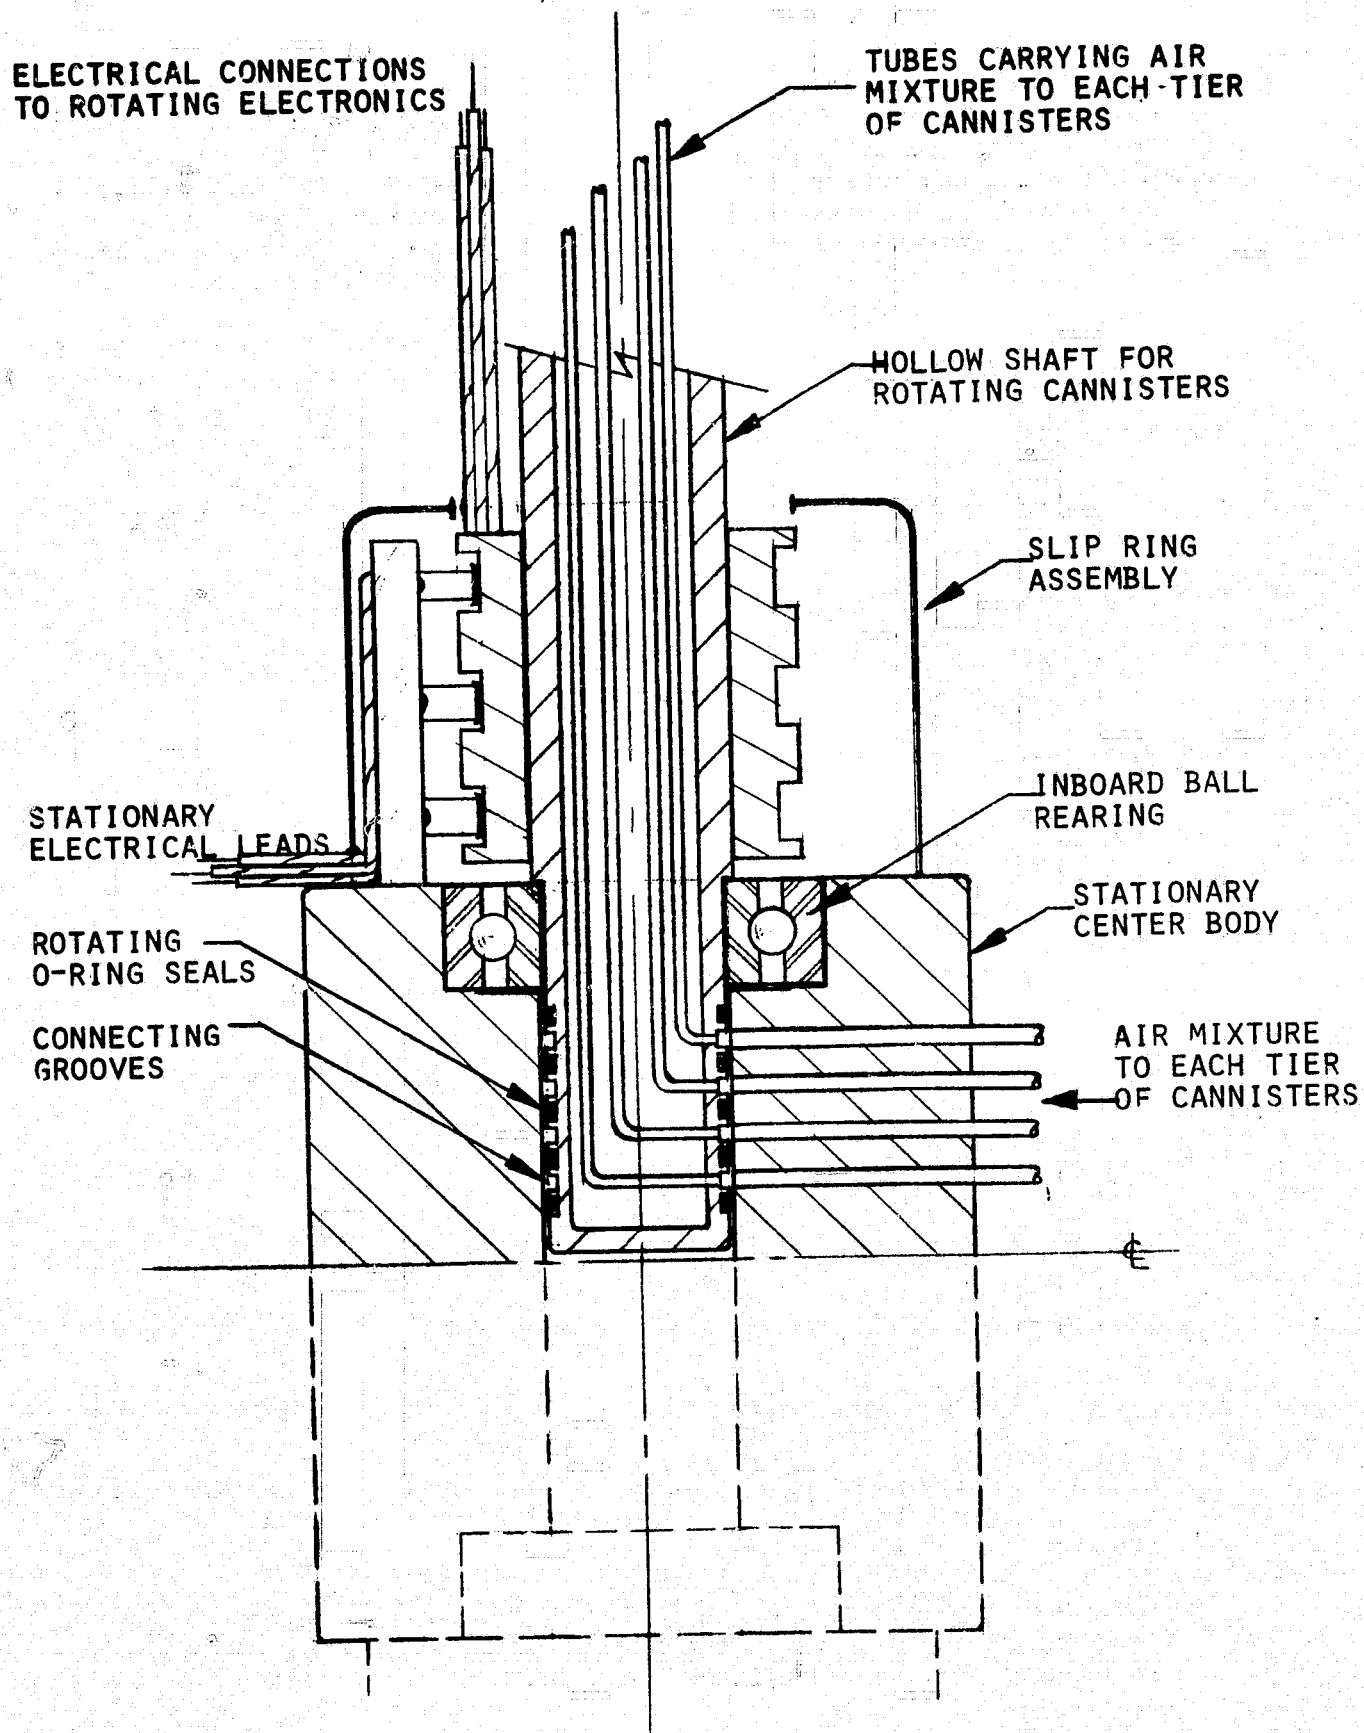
Detail of Rotating Gas Unions, Shaft Bearing, and Slip Rings for One Rotating Shaft.
